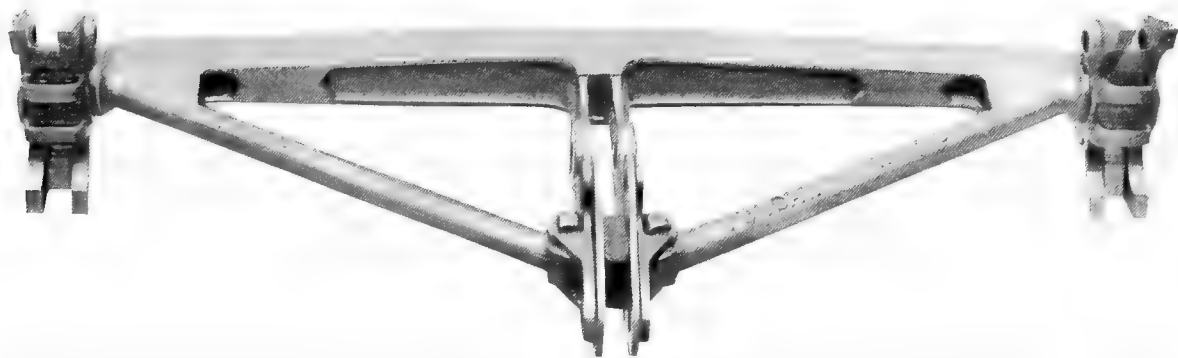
Vulcan No. 123 Cast Steel, Adjustable Head, High Speed Passenger Brake Beam for Six-Wheel Trucks. American Steel Foundries.
